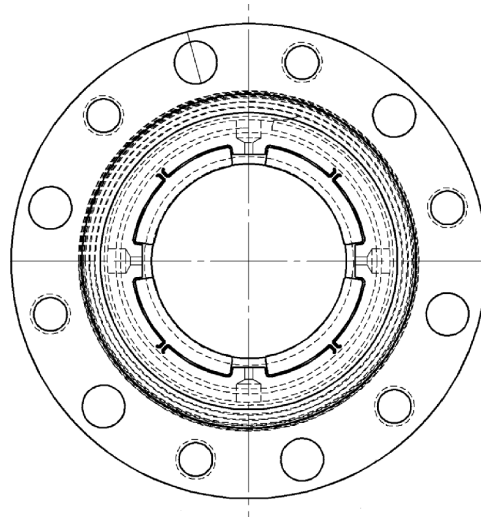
FPB front view ($m = 0.3$), bearing diameter 38.23 mm (1.505 in.).
